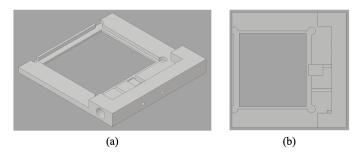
CAD drawing of the alternative 3D printed array holder design: (a) tilted view, (b) top view.
